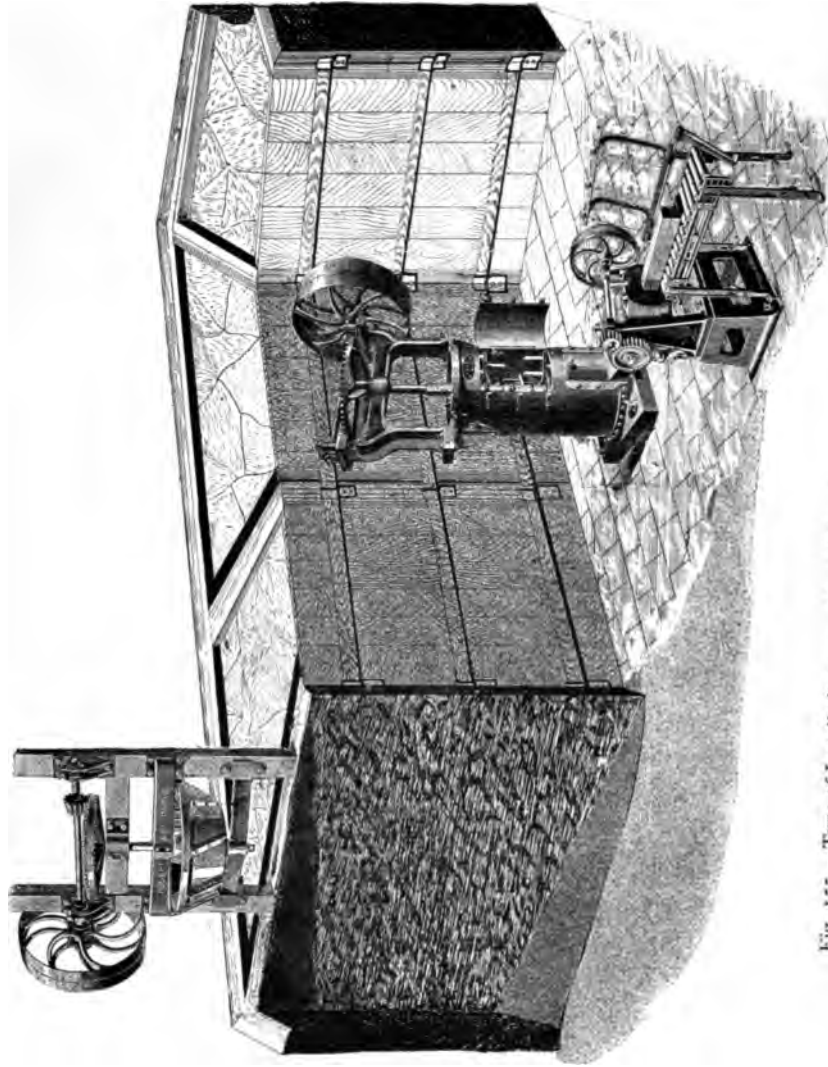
Type of Installation comprising Mixing Mill, Pug-mill, and Cylinder Machine.
